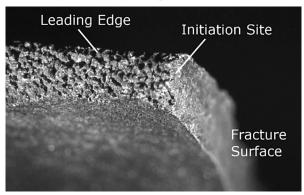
Liquid Droplet Erosion on the Leading Edge of an Impeller Blade Leading to a Fatigue Fracture.
